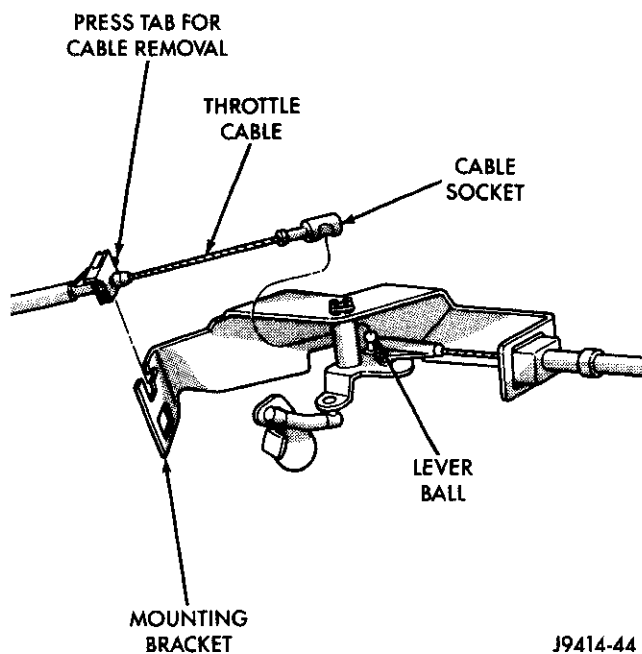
Throttle Cable at Throttle Body—8.0L V-10 Engine
